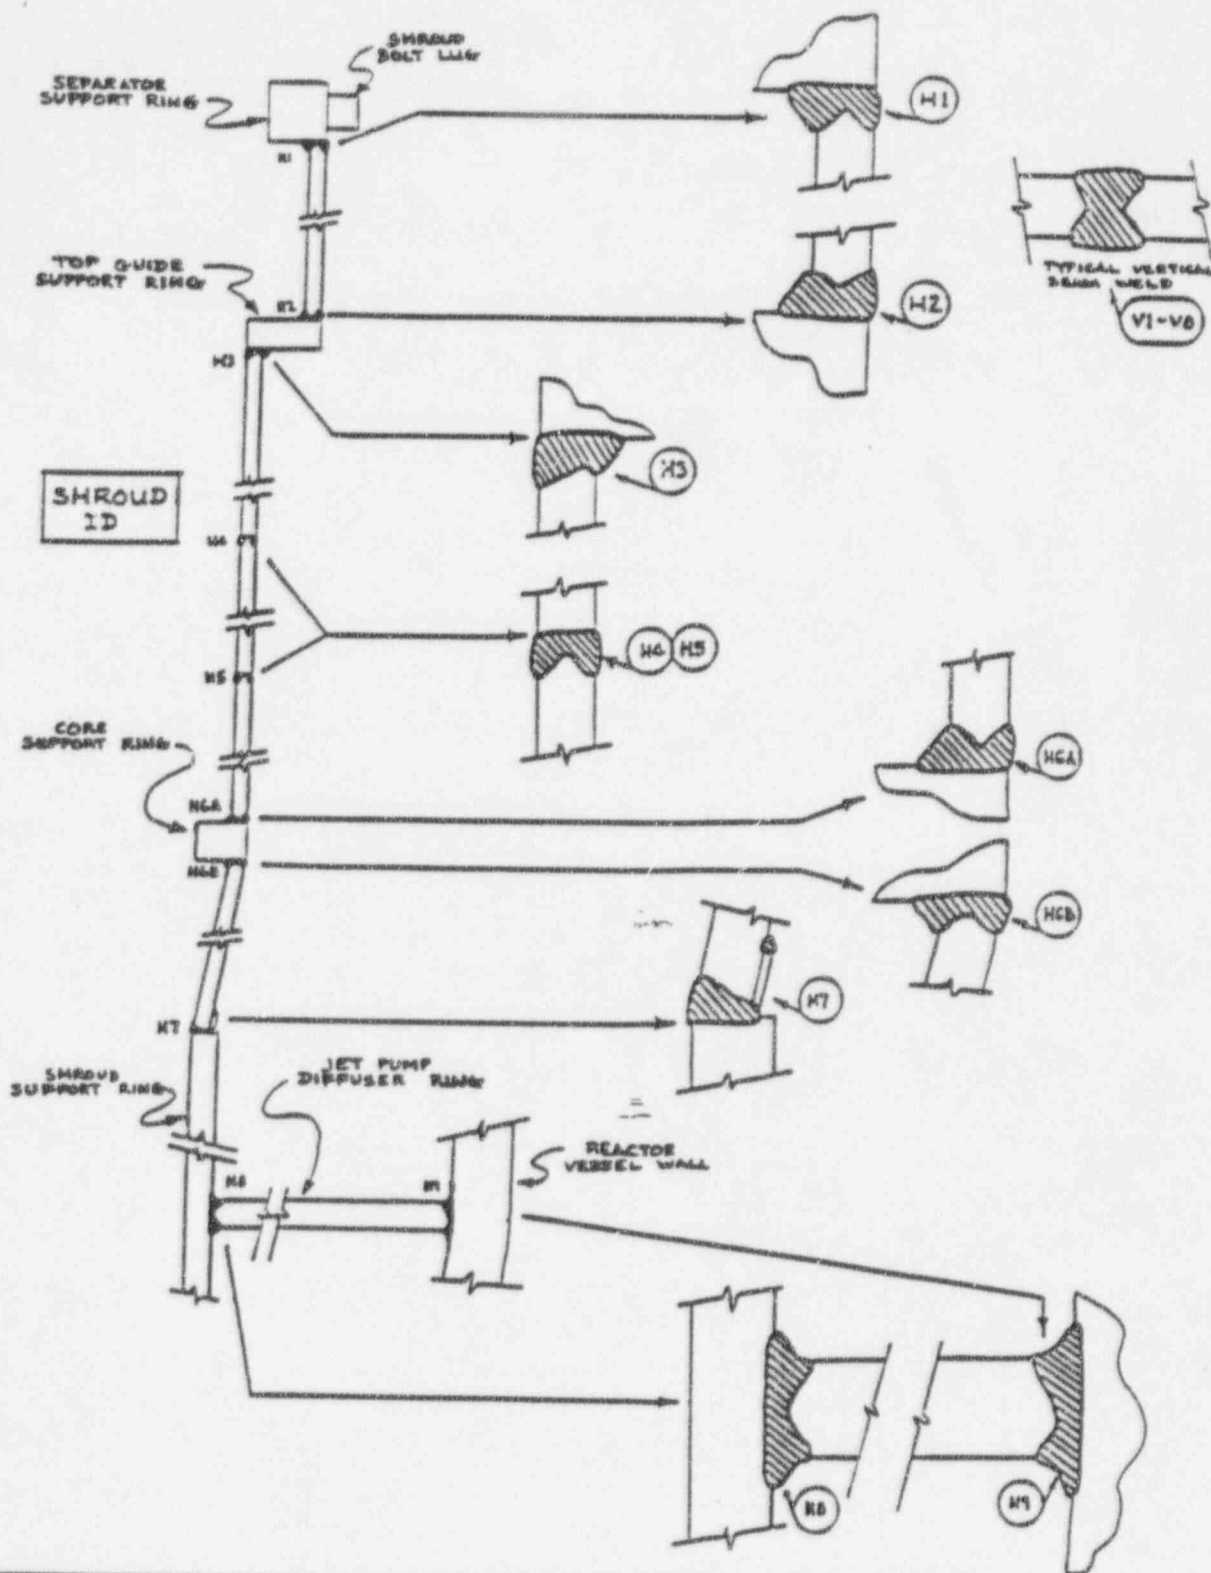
Shroud Cross-Section Showing Welds
